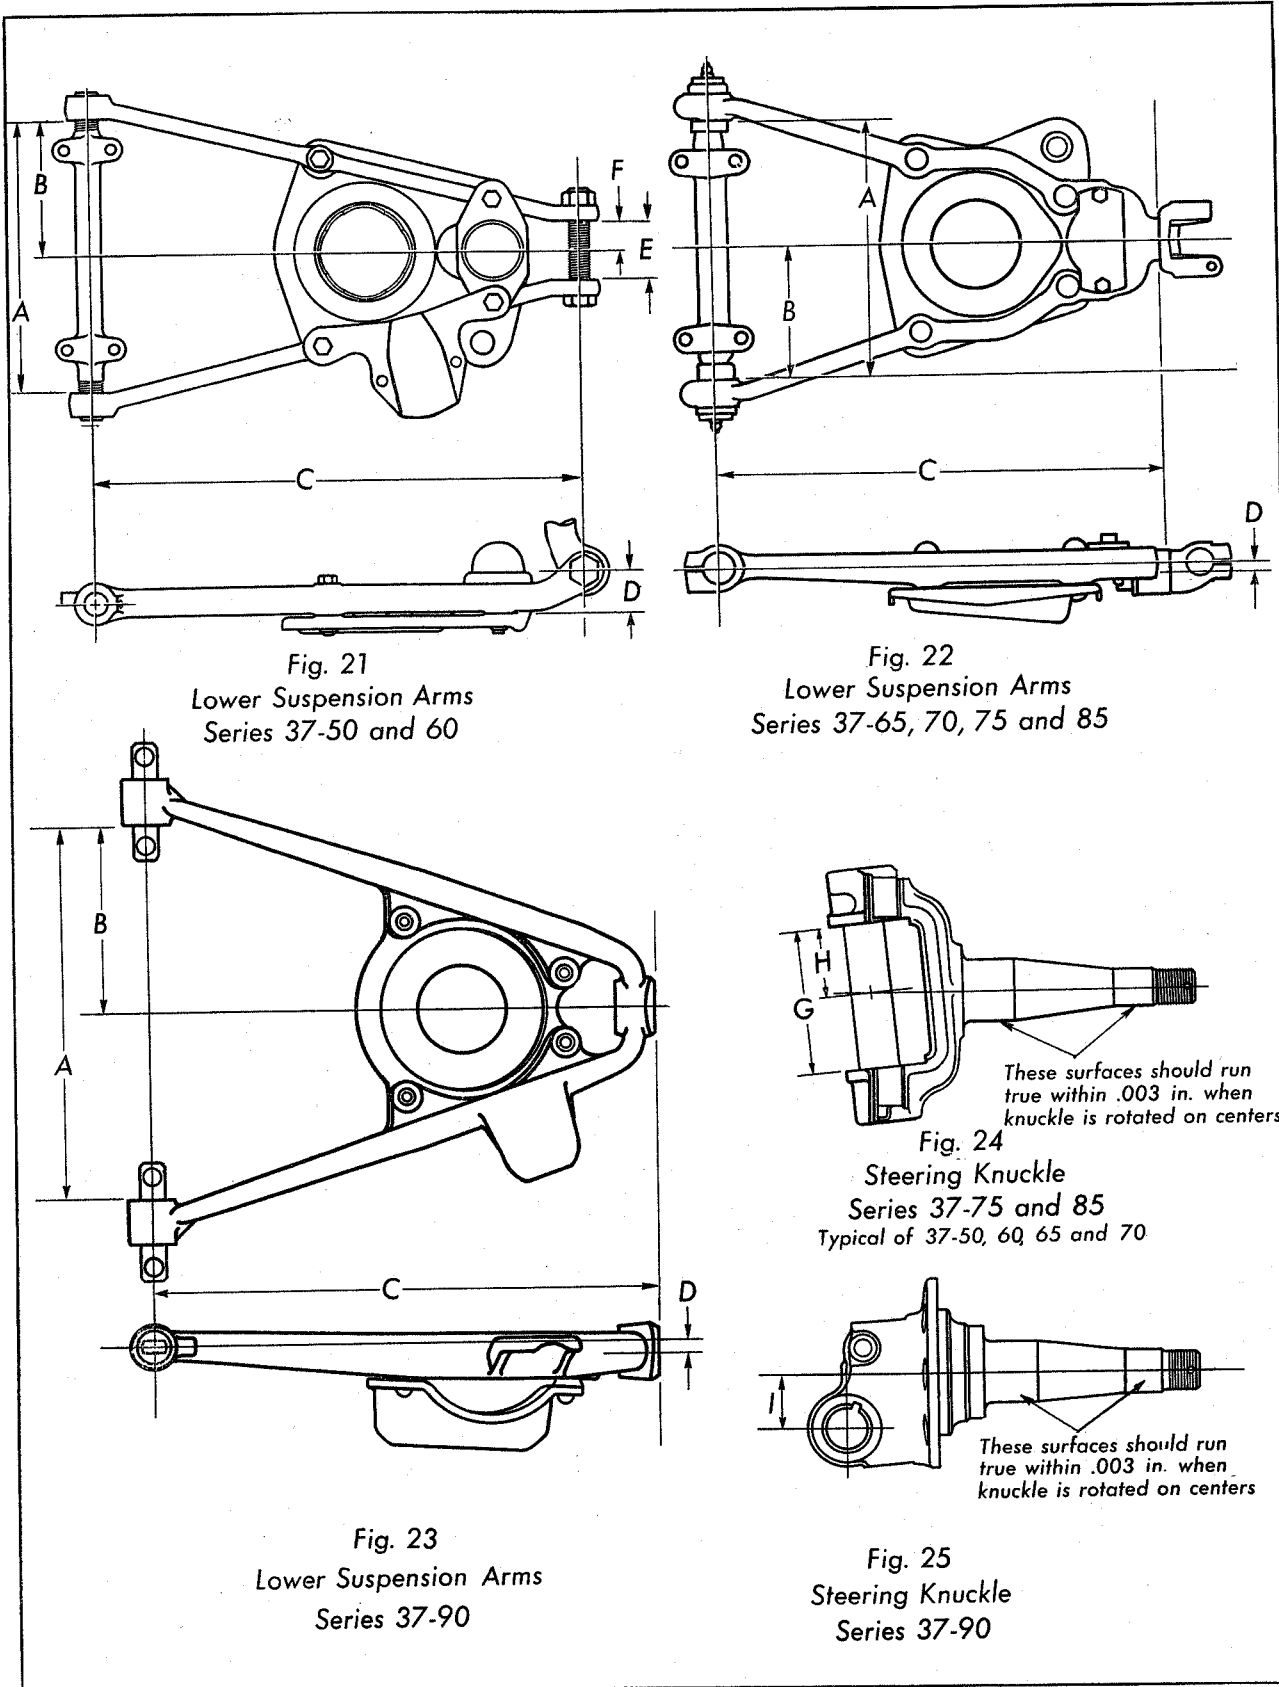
Alignment of Suspension Arms and Steering Knuckles
